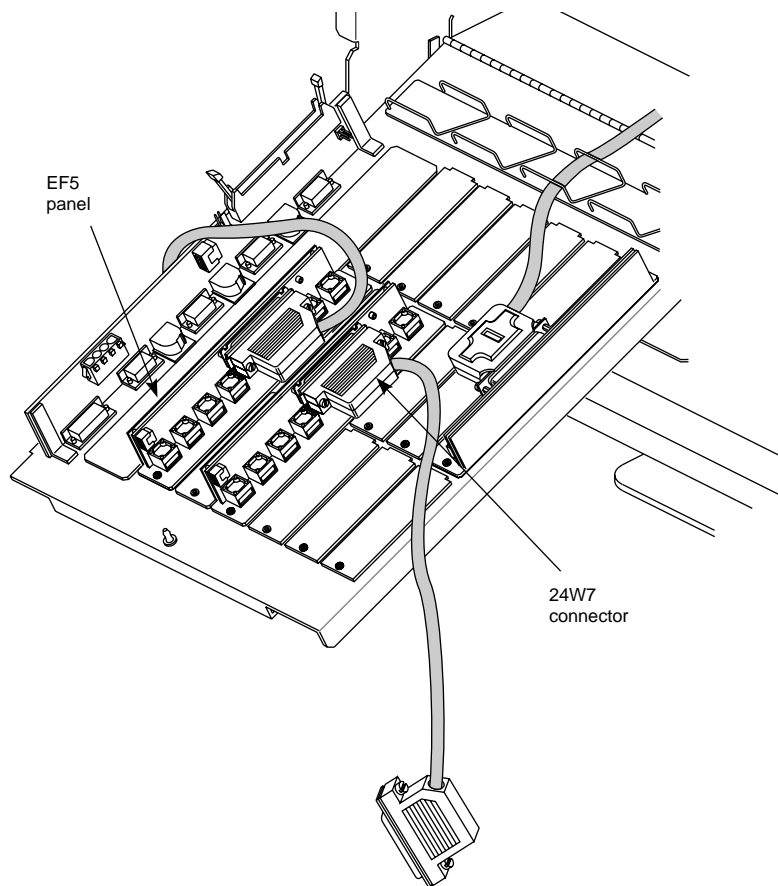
Two EF5 Panels and 24W7 Cables Installed
